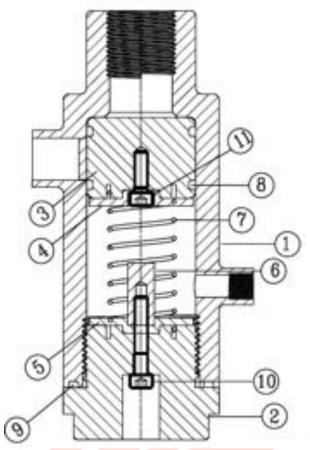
Details view of assembly of the Drain Valve As shown as dia. This is an assembly of drain valve, all different parts of the drain valve shown with a numbers.
